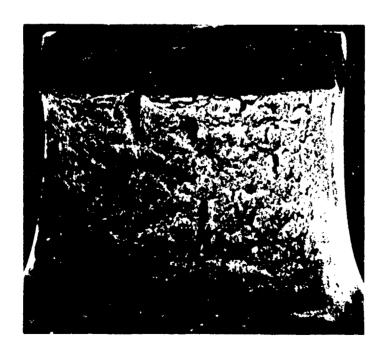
Fracture surface of an A-242 longitudinal Charpy specimen tested at 121°C, 10x.
